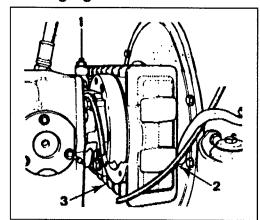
Transfer gearbox 1 Filler plug 2 Level plug 3 Drain plug
